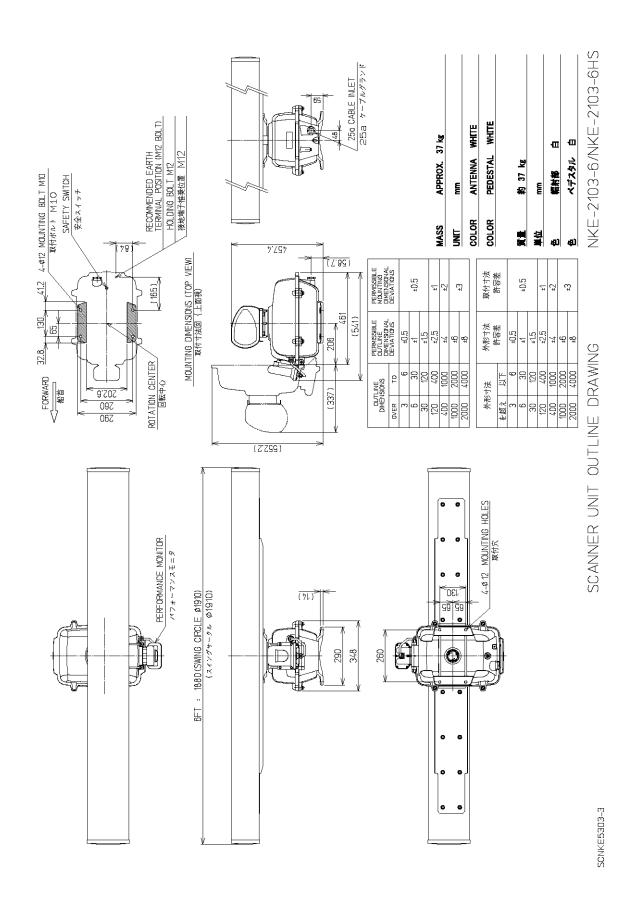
Outline Drawing of Scanner Unit, Type NKE-2103-6/6HS
